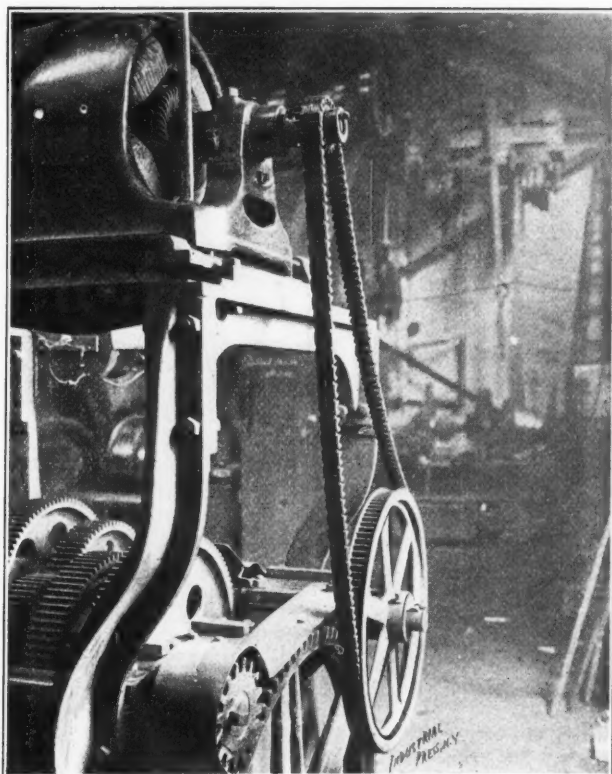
Old Roll Lathe Driven by Westinghouse Motor, Renold Chain.
